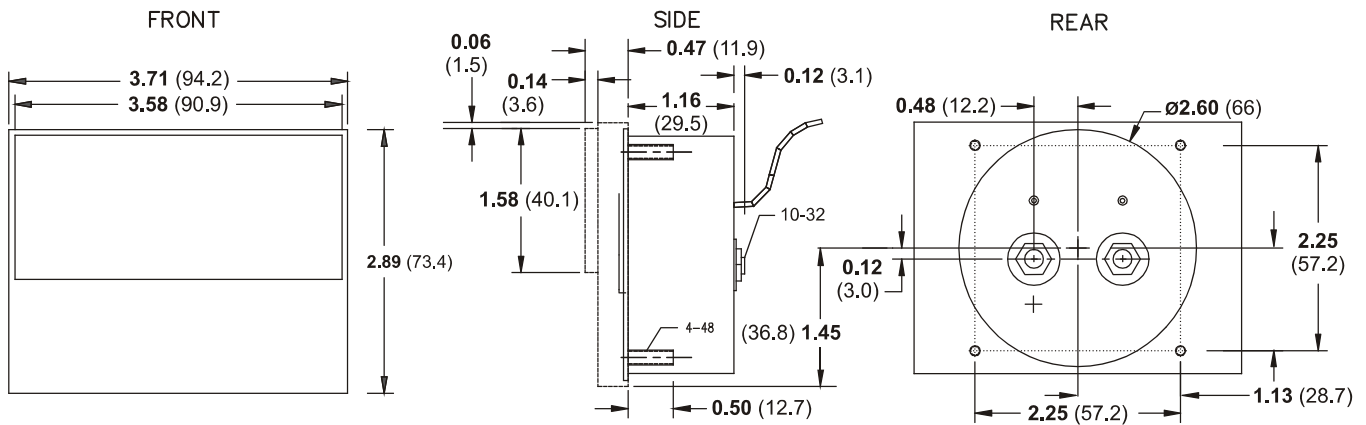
ACCESSORY TENSION METER DIMENSIONS (DFE P/N 722-1385)
